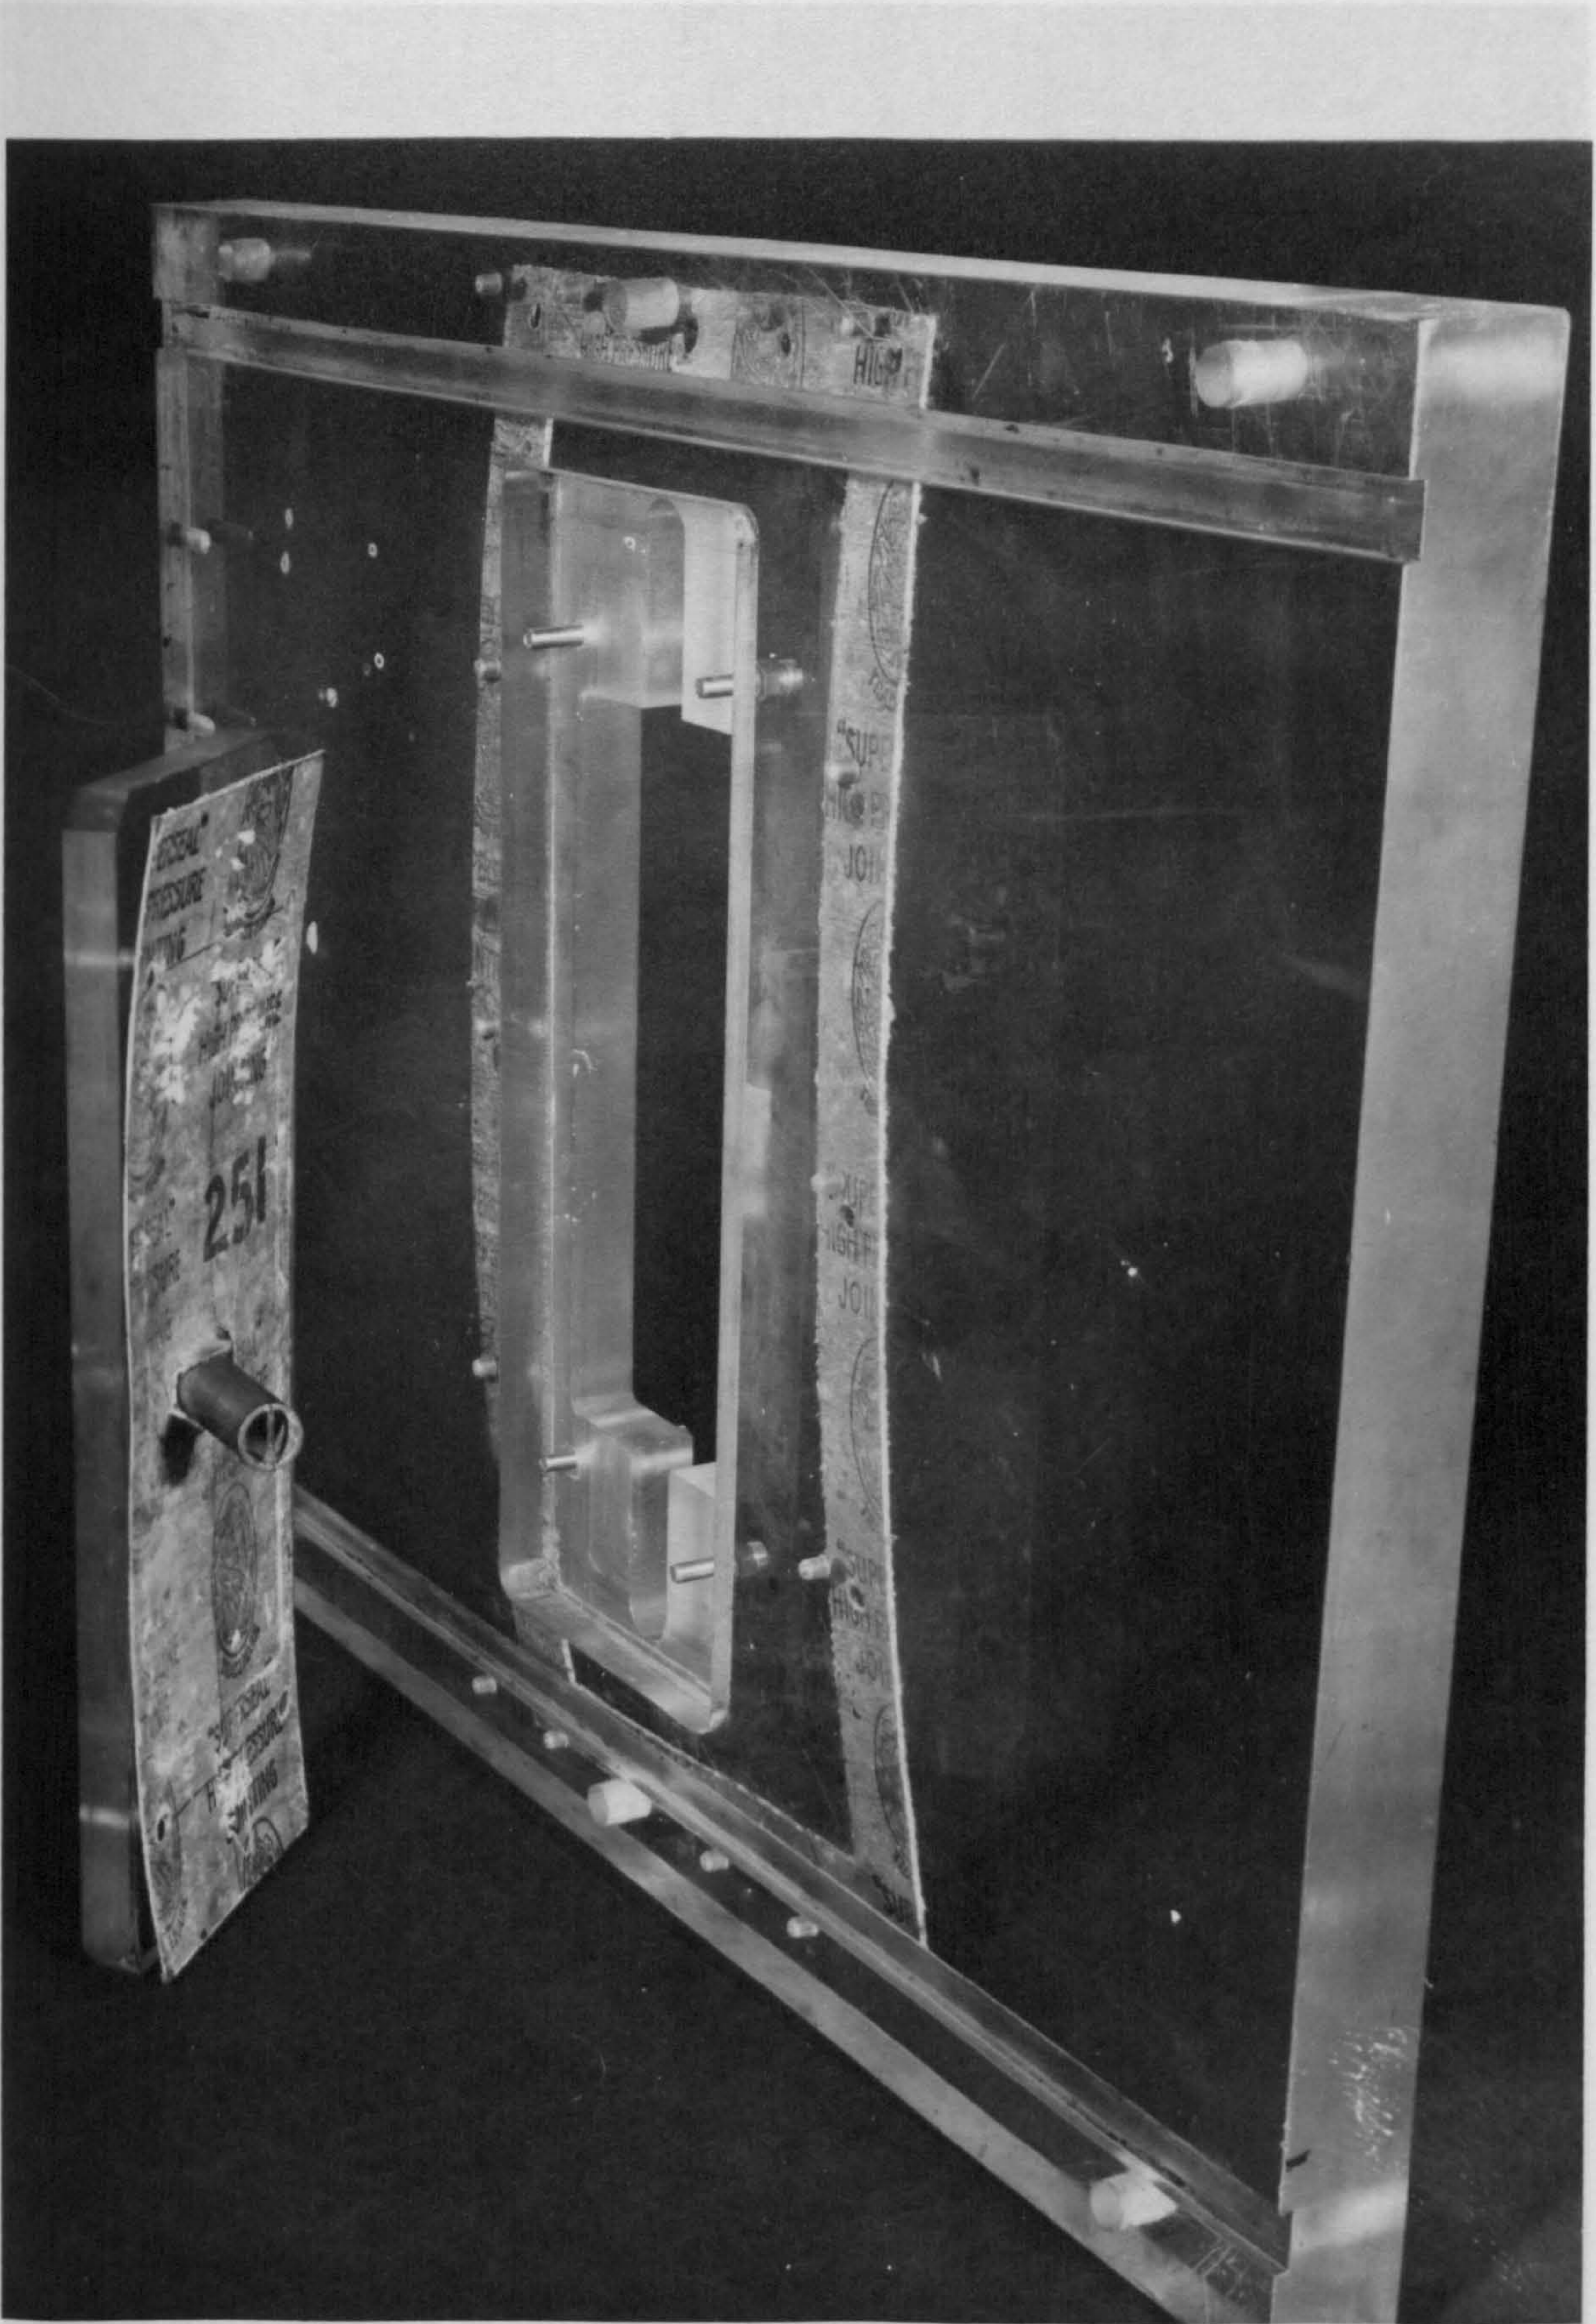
NOZZLE TRAY FITTING INTO POSITION ON NOZZLE PLATE
